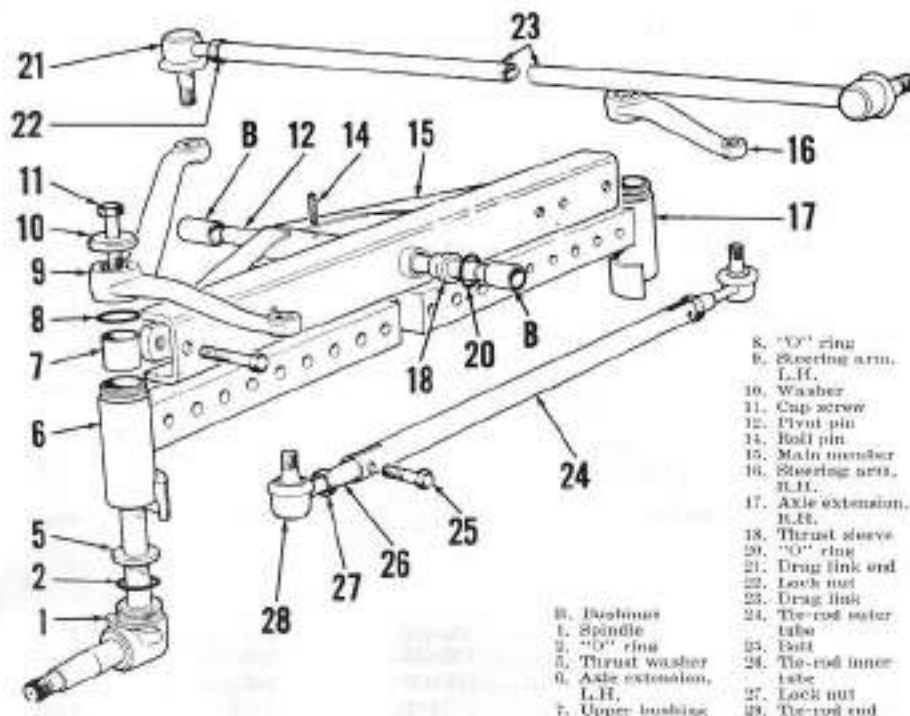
Exploded view of model 770 front axle. Pivot pin bushings (8) are carried in main frame and front support casting.
